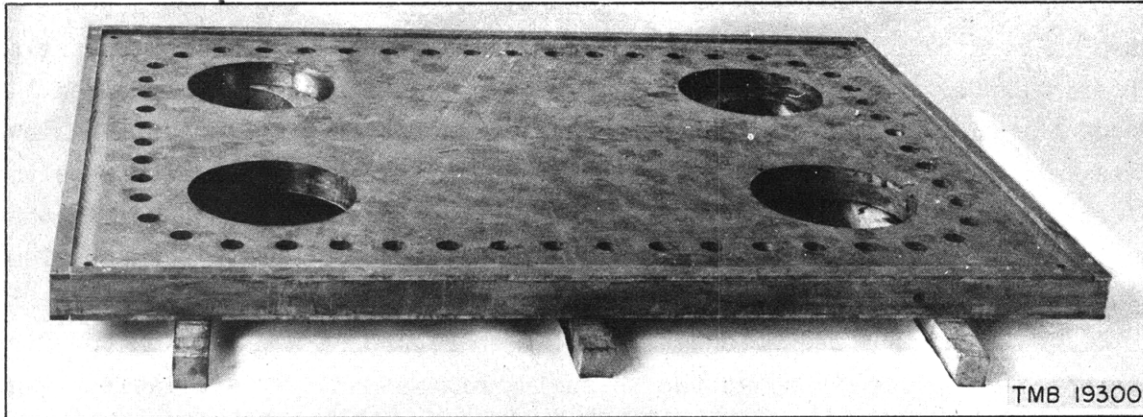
Compression Plate with Spacers Ready for Welding on Diaphragms
